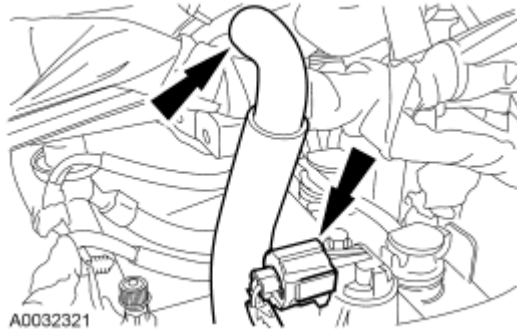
Locating EGR Tube To Cylinder Head
